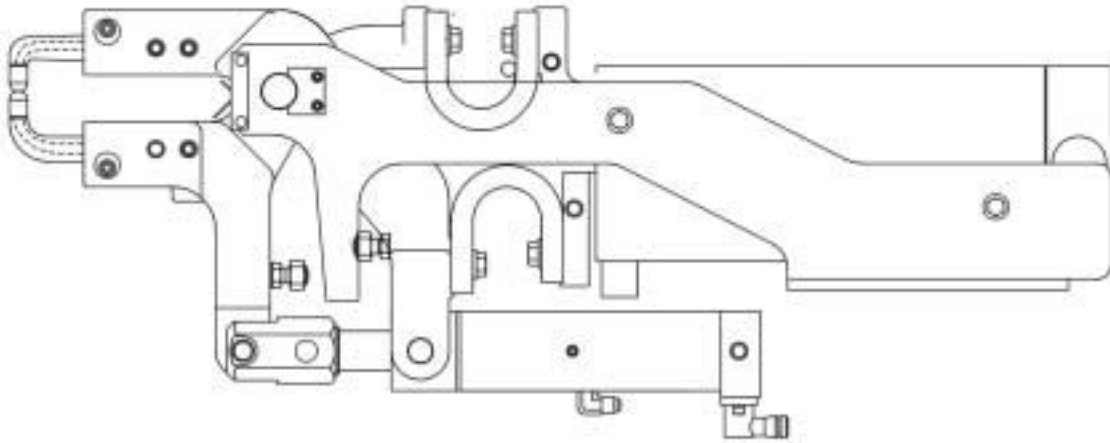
Fixture Style, Pinch-Type Gun w/Transformer
